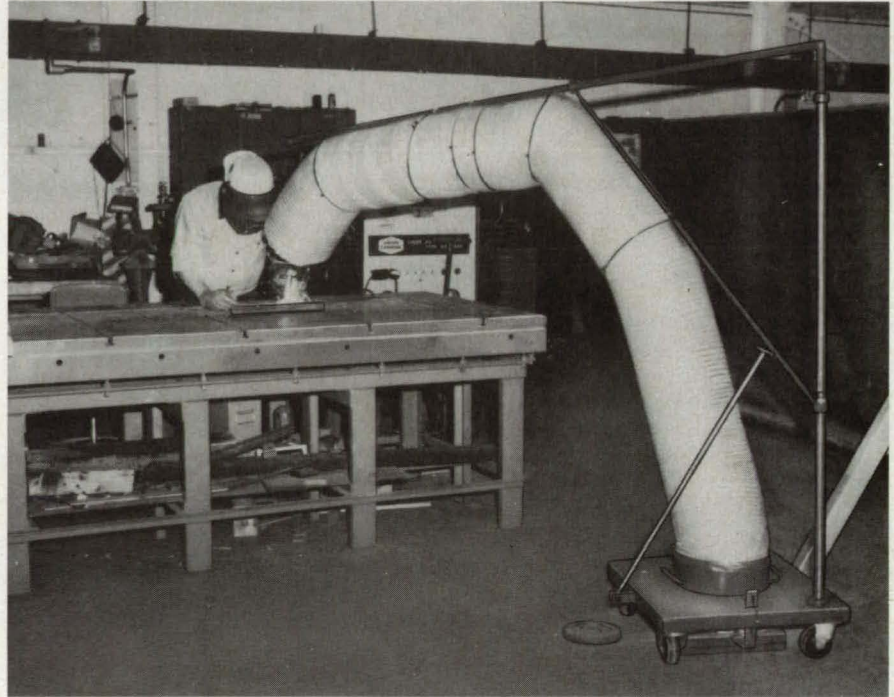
The Exhaust Duct Scoops Up welding fumes at one end and passes them to the exhaust system at the other.
